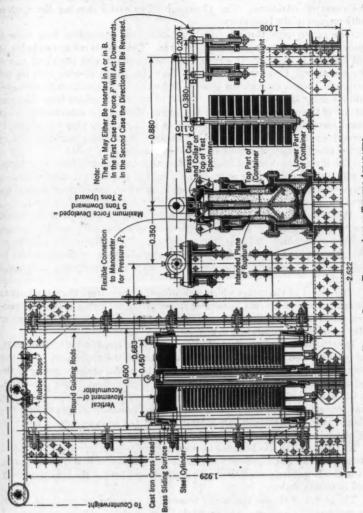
,-VERTICAL SECTION THROUGH AXIS OF TESTING APPARATUS
